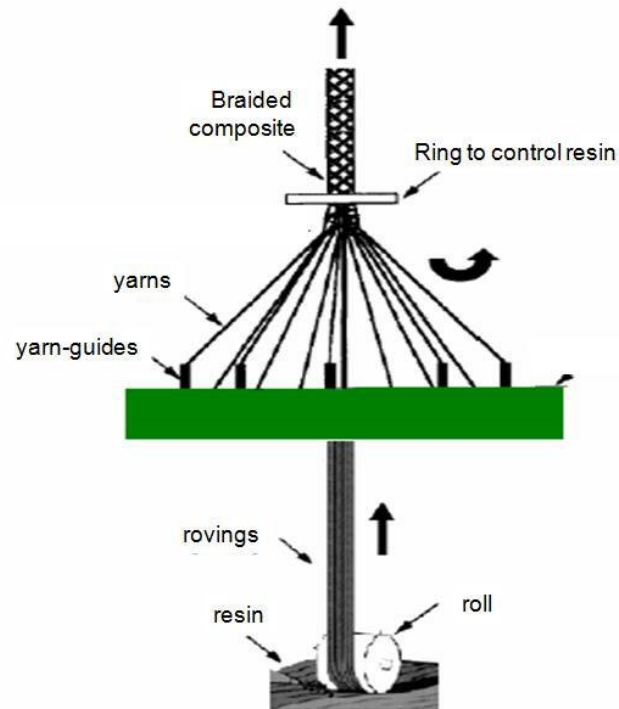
Braiding with axial reinforcement and resin bath set-up [97].
